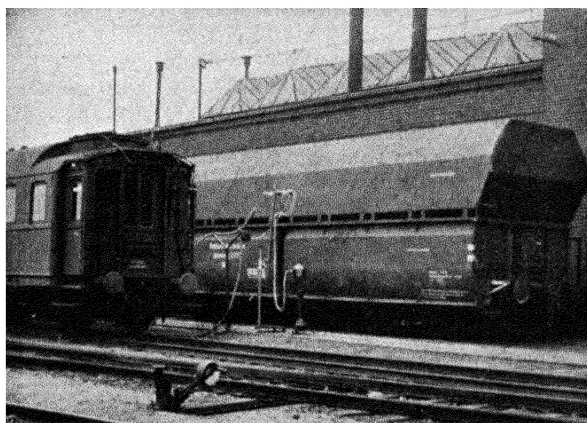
Standard x-ray equipment on a German railroad for radiographic examination of locomotive parts and welds.
